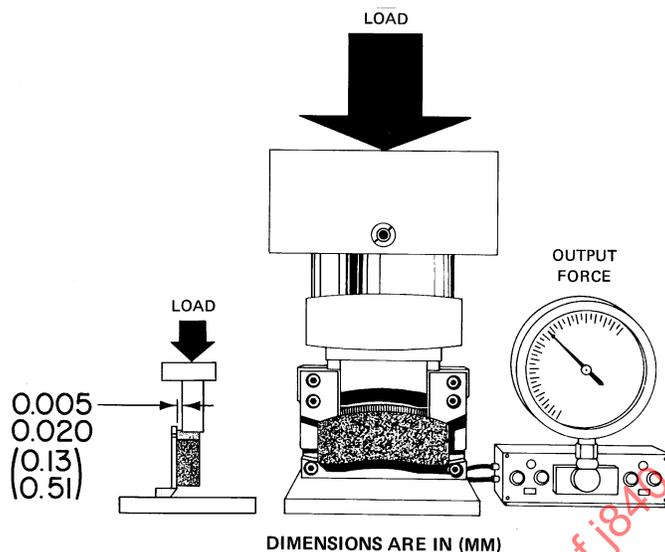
DISC BRAKE SHEAR TEST FIXTURE
